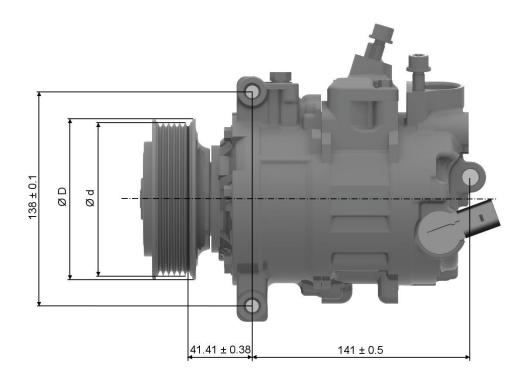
Dimensions of refrigerant compressor, pulley diameter 110 mm (side view)
